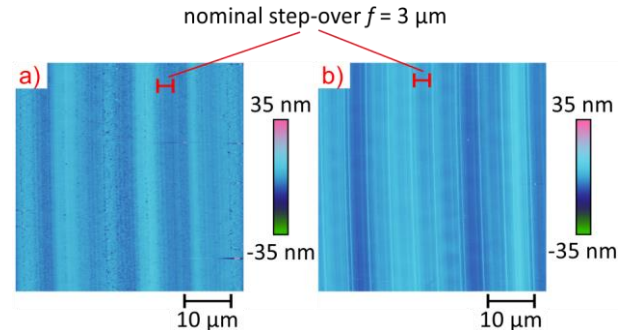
AFM images of vacuum clamped specimen (a) machined with a tool radius $r_e = 1$ mm at a step-over f of 3 μ m and glued specimen (b) machined with a tool radius $r_e = 1$ mm at a step-over f of 3 μ m.
